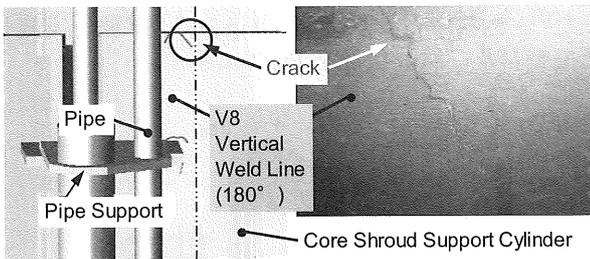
Example of Crack (Near V8 Vertical Weld Line)
